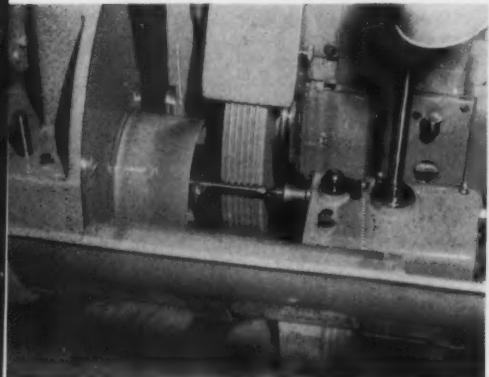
Blanks are plunge-ground to form the slider lands and grooves prior to a finish O.D. grind, under precision control.
